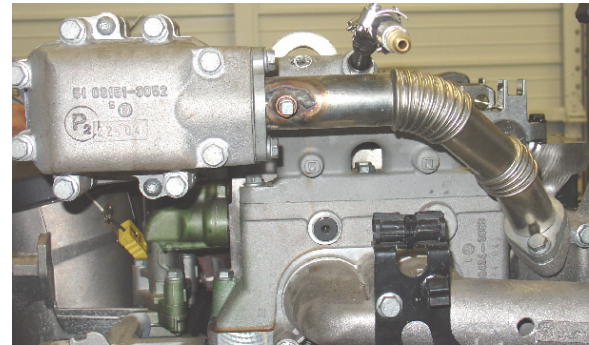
Reed Valve Housing and Crossover Tube (installed, front view)
